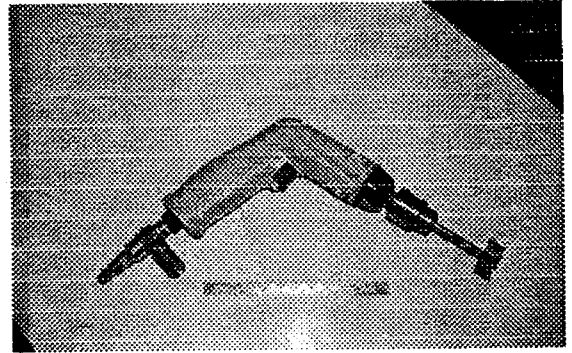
Air drill with manual speed adjustment located at bottom of handle.
